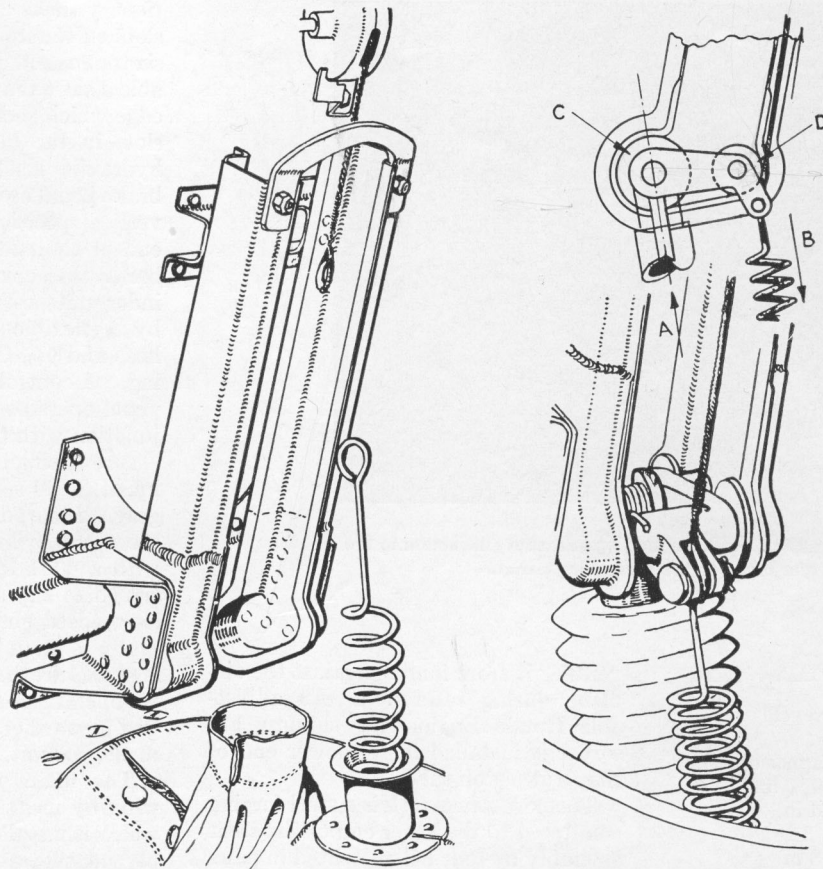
Details of the tail-wheel retracting gear and roller locking device. At the left is the track (with oleo and lock removed), which is riveted to the aft face of the diagonal member of the assembly. The oleo would extend up through the dust-catching fabric with bellows attached to the top. Also shown is a metal tube to prevent the coil spring from injuring the enclosing material. The sketch at the right shows gear in place and locked in DOWN position; in the upper right the method of locking is shown diagrammatically. *A* is the direction of the load thrust, *B* is the direction of pull by the coil spring. This pulls trigger roller *C* down into locking position, forcing large roller *D*, which takes the landing load thrust from the top of the oleo, into its DOWN position.
